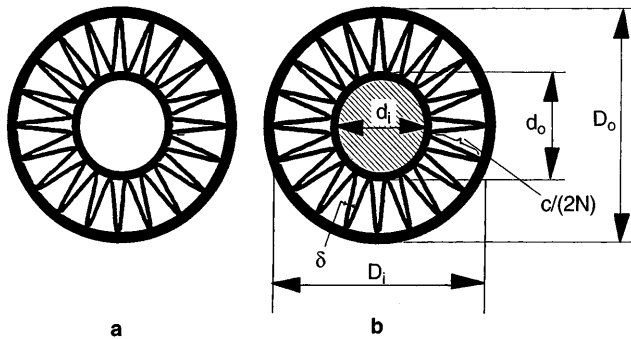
Cross-section view of tube (a) unblocked (b) blocked
